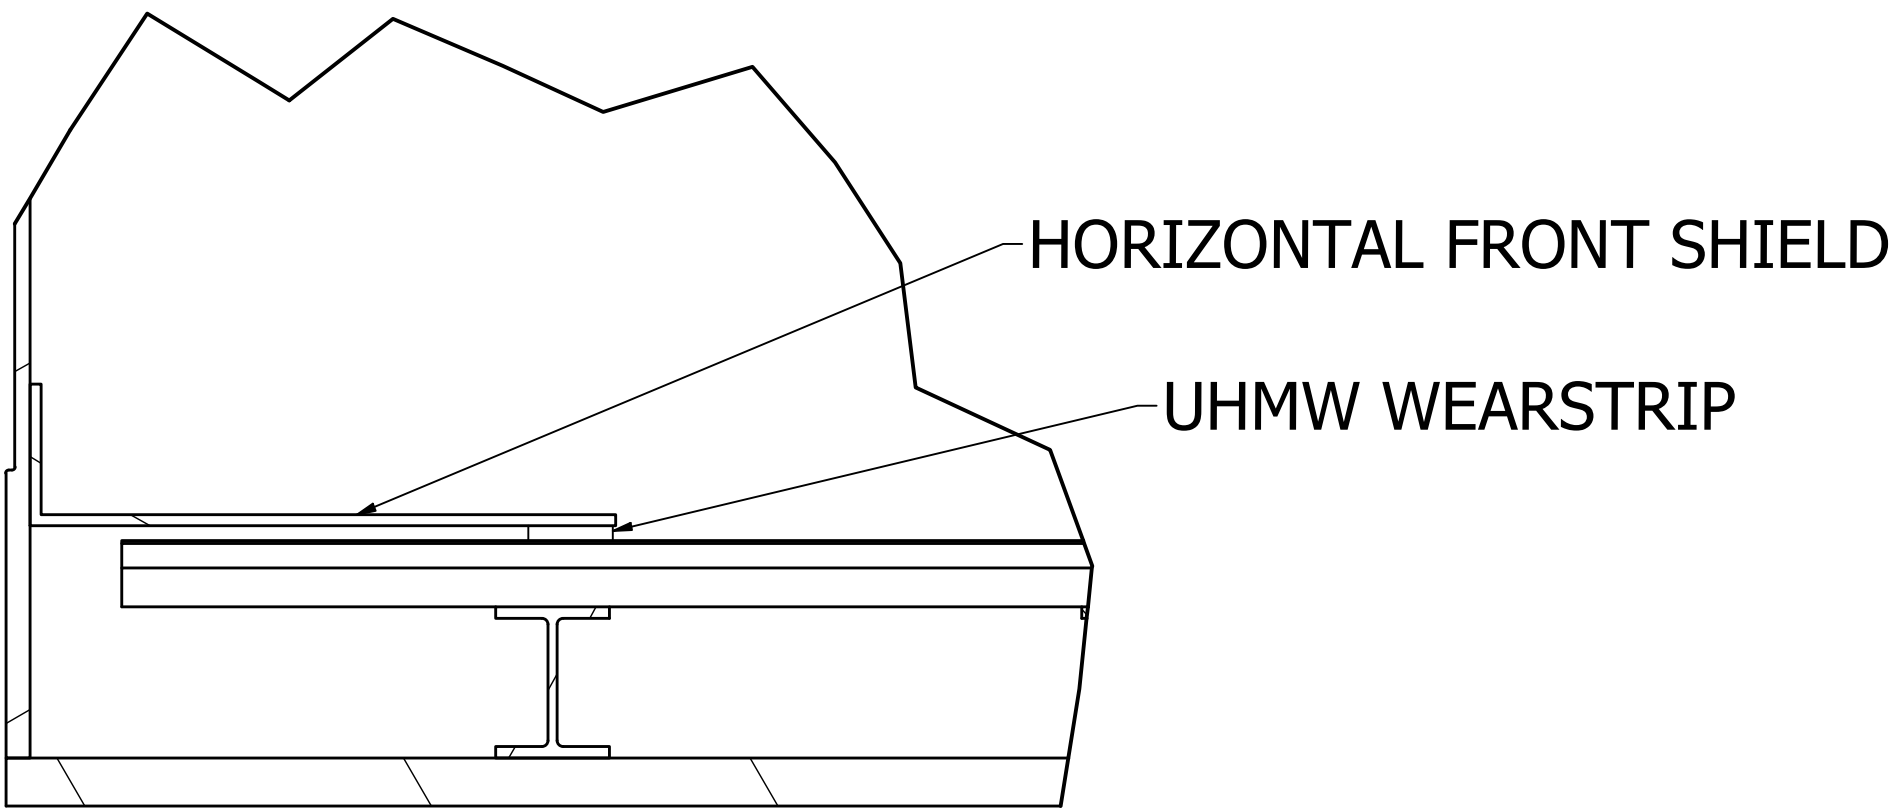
HORIZONTAL FRONT SHIELD INSTALLATION
